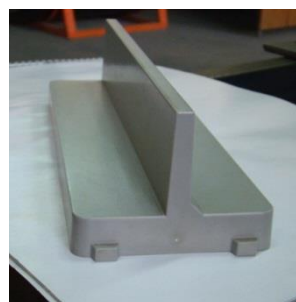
Sample of the fillet weld model on the Fronius VWTS
